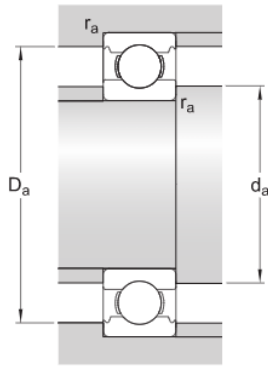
Technical dimensions of SKF_6301 deep groove ball bearing
